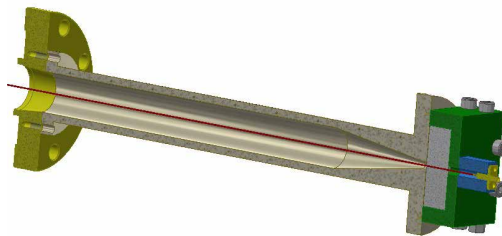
The CAD drawing of the matching section and mounting of the wire with the ceramic fasten block.
